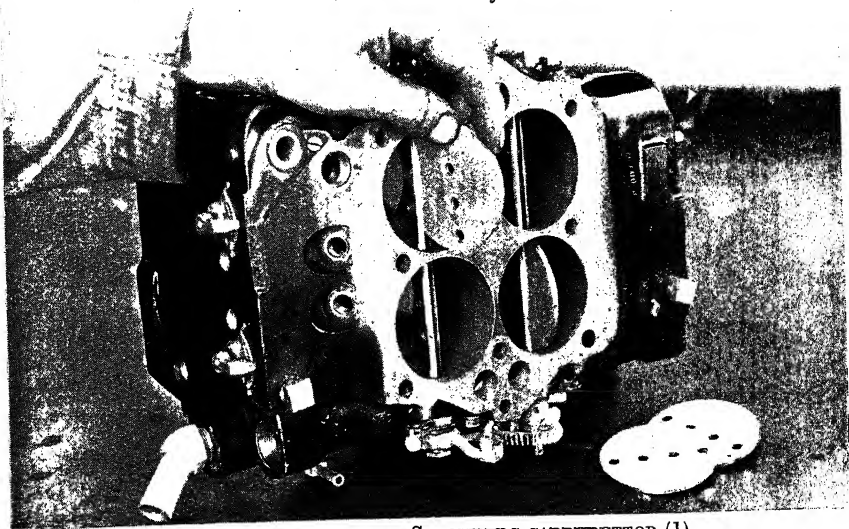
A.—SERVICING A STROMBERG CARBURETTOR (1)
